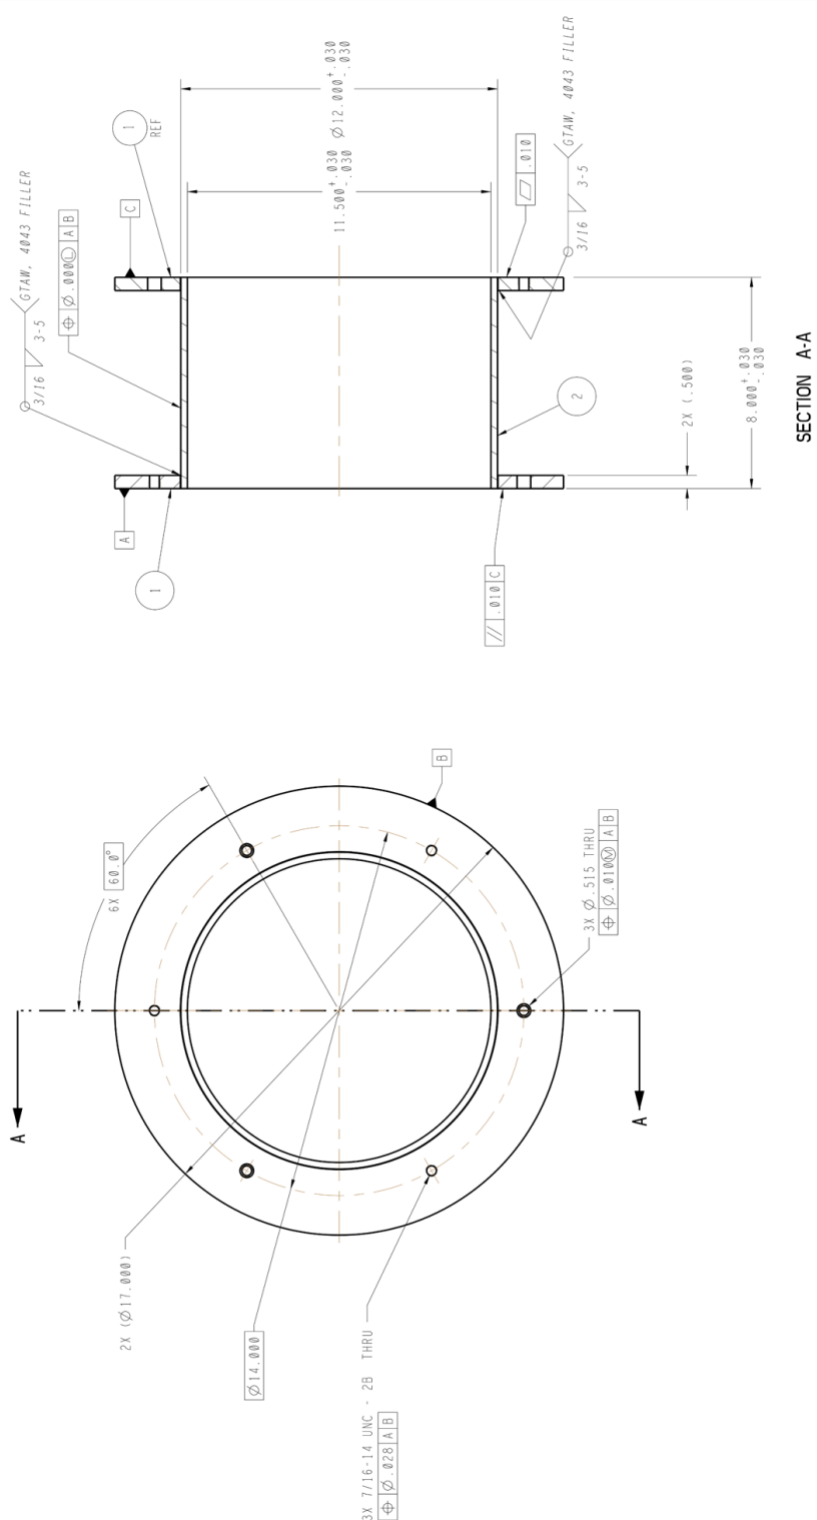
Schematic of the adapter extension, part of the lower adapter (dimensions in inches).
